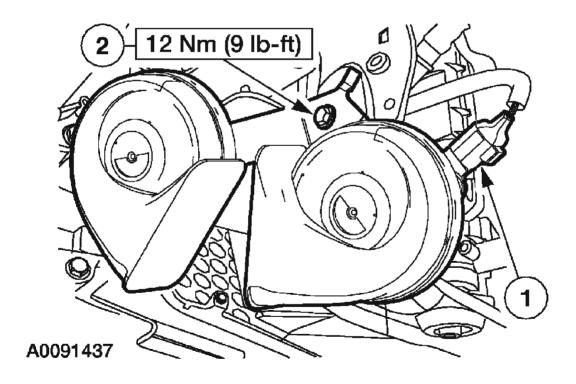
Disconnecting Electrical Connector, Removing Bolt And Horn Courtesy of FORD MOTOR CO.
